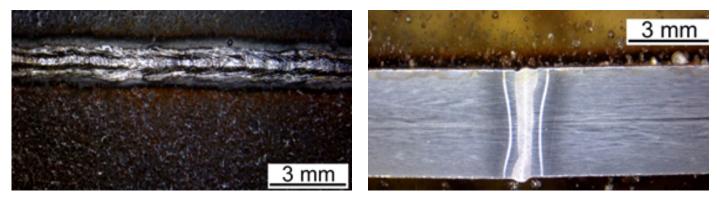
Weld face (a) and the macrostructure in the cross-section of the joint (b)
